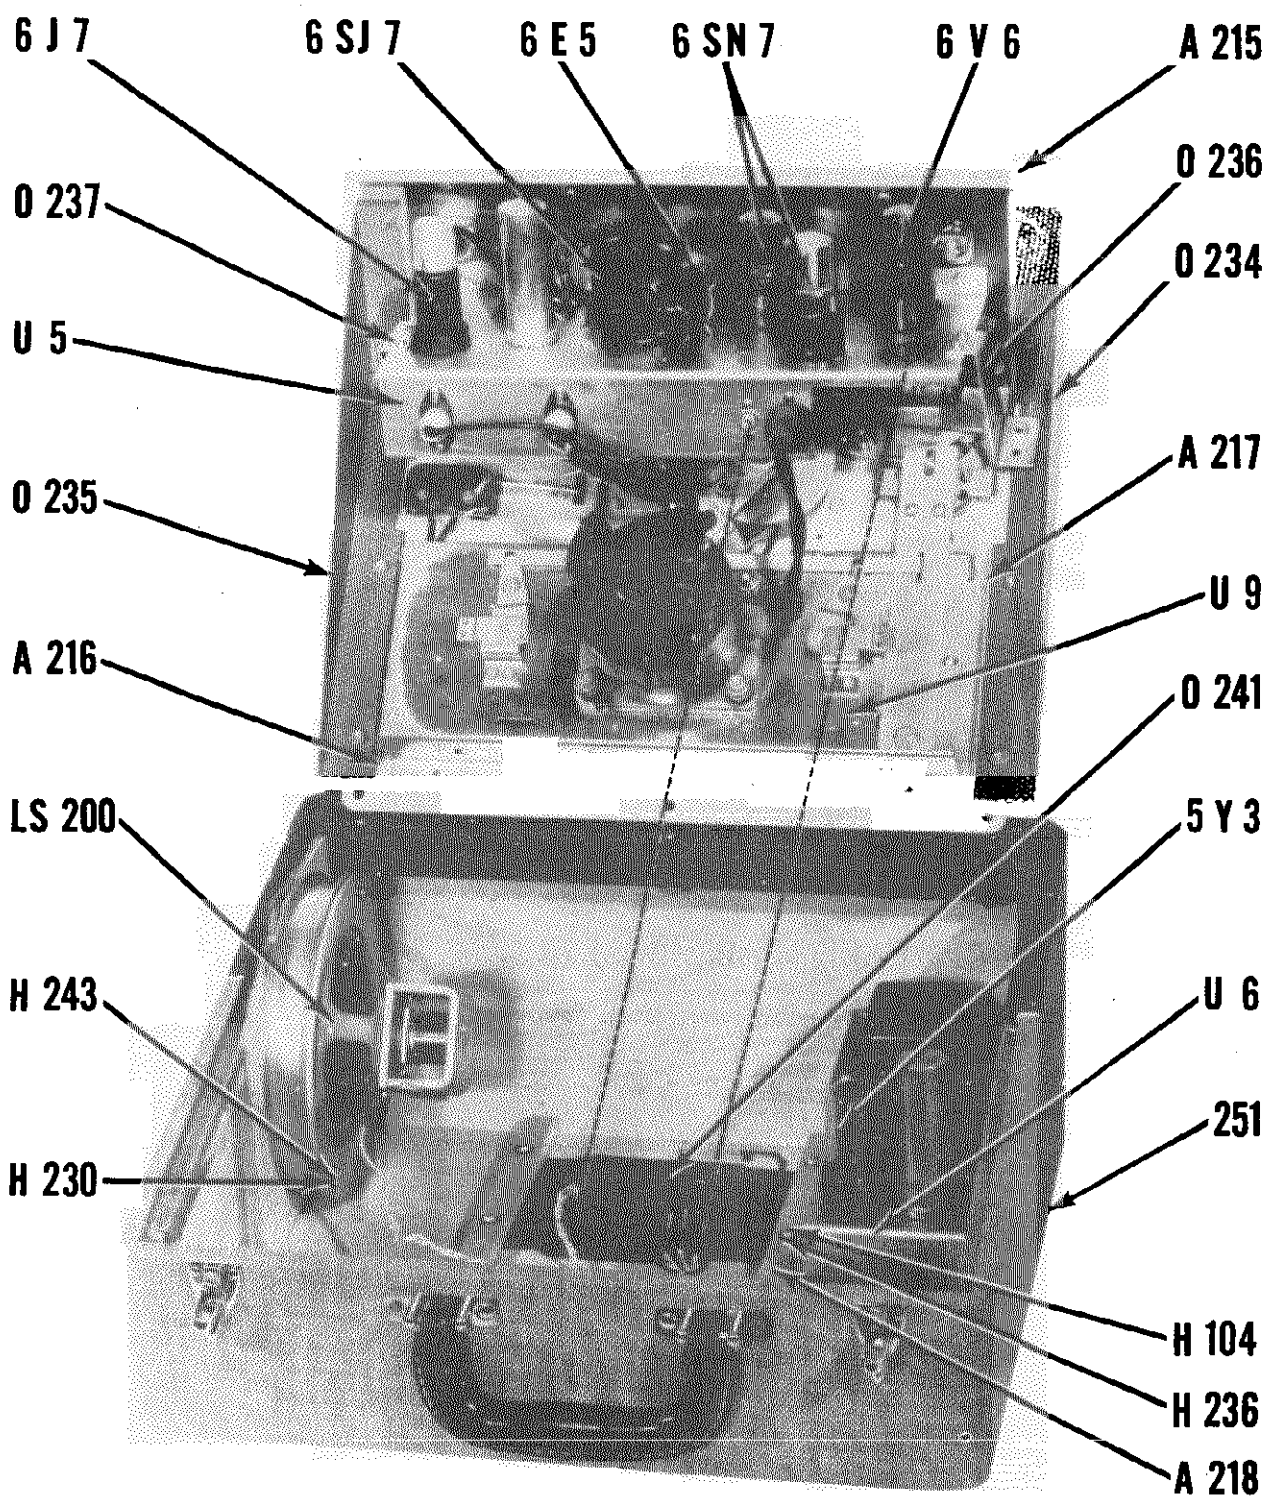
PORTABLE SOUND MIRROR DISASSEMBLED
